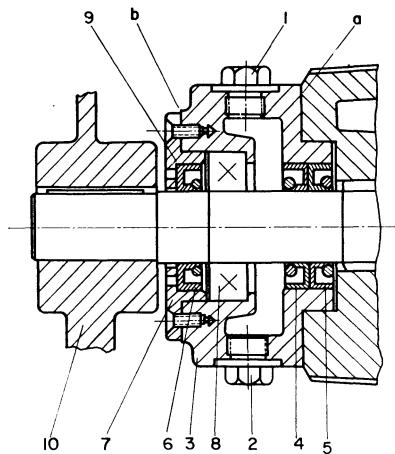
Spring-loaded lip seals, used to seal the rotary shaft of a vacuum pump
